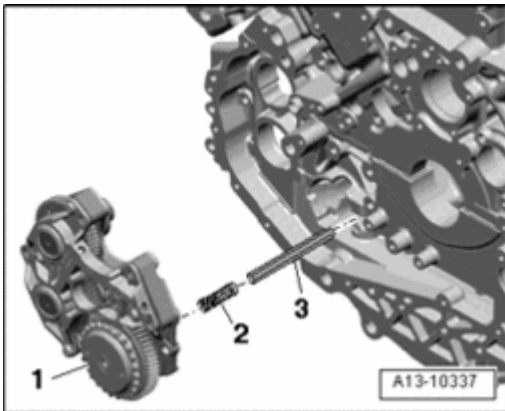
Removing/Installing Compression Spring Between Spur Gear Unit And Oil Pump Input Shaft
